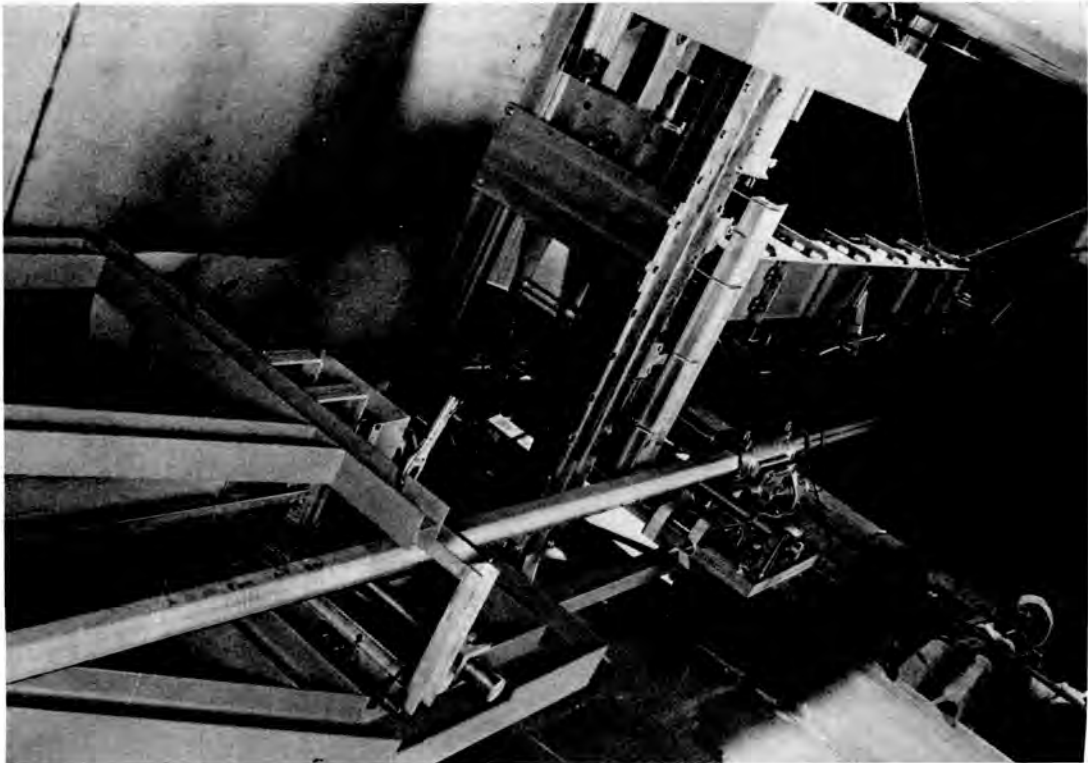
Assembly of the Shear/Compactor at Dreux, France.
